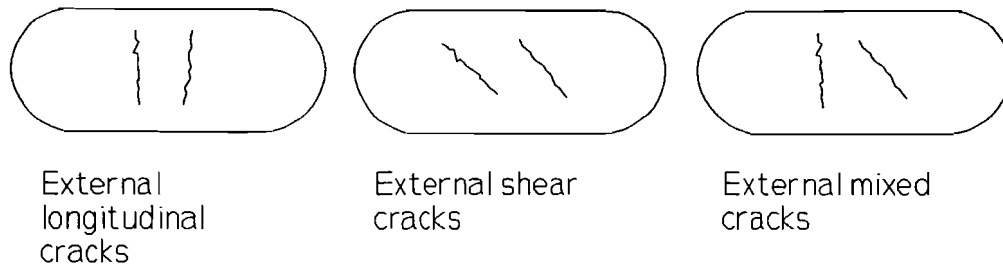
α -Crack, a crack which appears at the midheight of the specimen. Depending on the degree of end constraint and geometry of the specimen, either longitudinal or oblique cracks occur.
